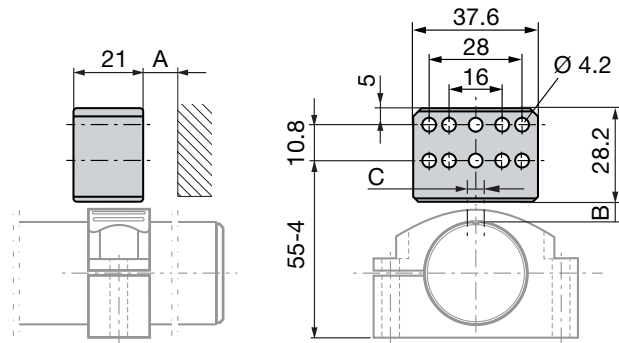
Dimensions and distances with BTL6-A-3800-2 magnet
